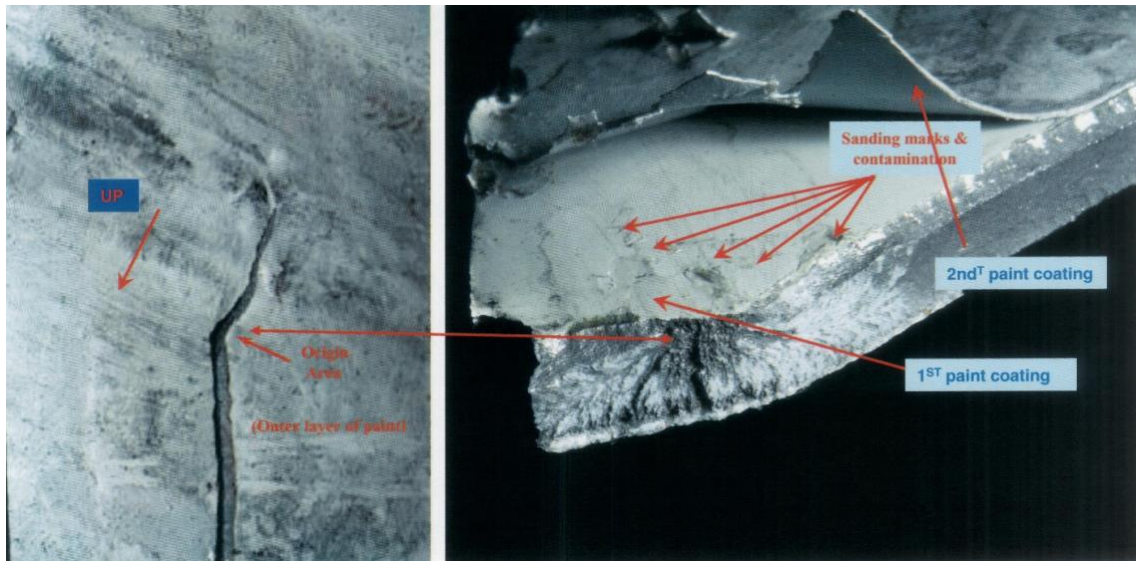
Cross-sectional view of the CLG strut cylinder, showing the intergranular cracking that initiated the failure [214].
